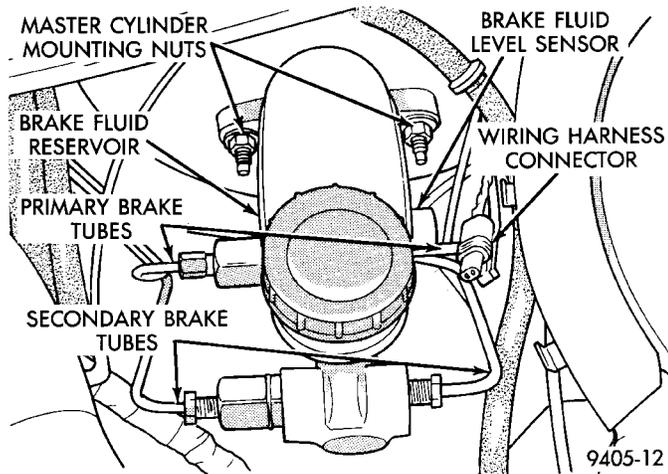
Primary And Secondary Brake Tubes W/O ABS Brakes
